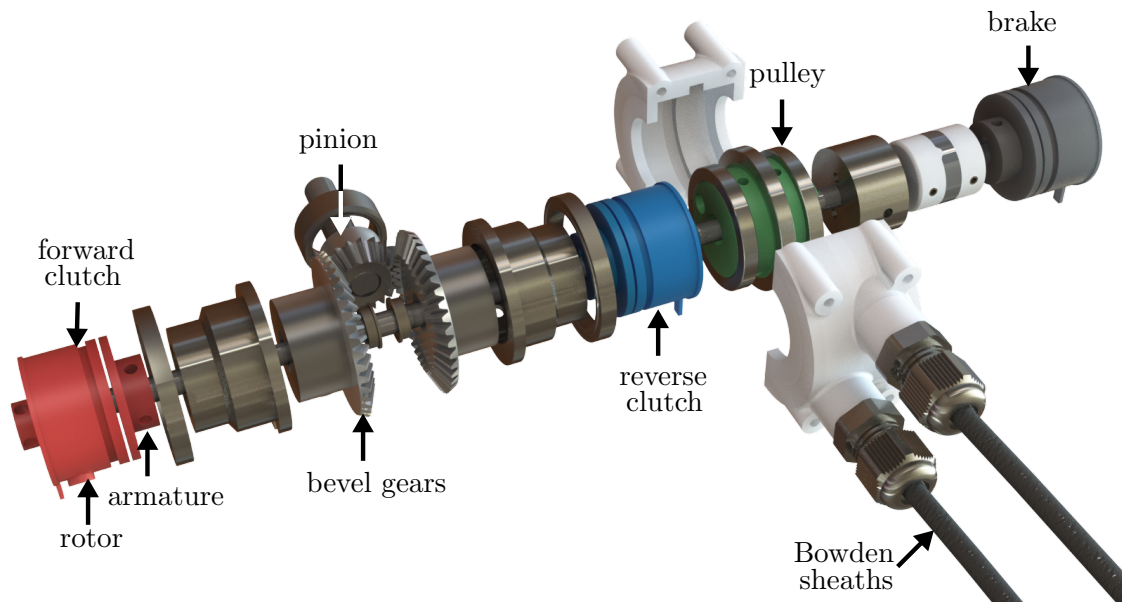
Mechanical design of a One-To-Many (OTM) module. Each module receives power from the prime mover through a pinion, connected to two, opposite-facing, bevel gears that rotate in opposite directions. Each bevel gear can be coupled to the passing countershaft by engaging an ElectroMagnetic (EM) clutch, selectively rotating it in either direction. A third EM clutch can connect the countershaft to the frame, acting as a break. The shaft drives a pulley housing the antagonistic Bowden cables that actuate the soft exosuit.
